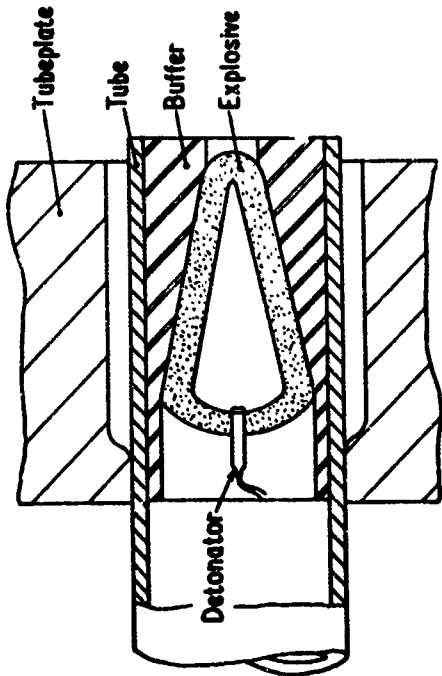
Schematic for Explosion Welding Tube to Tubeplate Using a Supersonic Detonation Rate Explosive and a Tapered Buffer (4).
